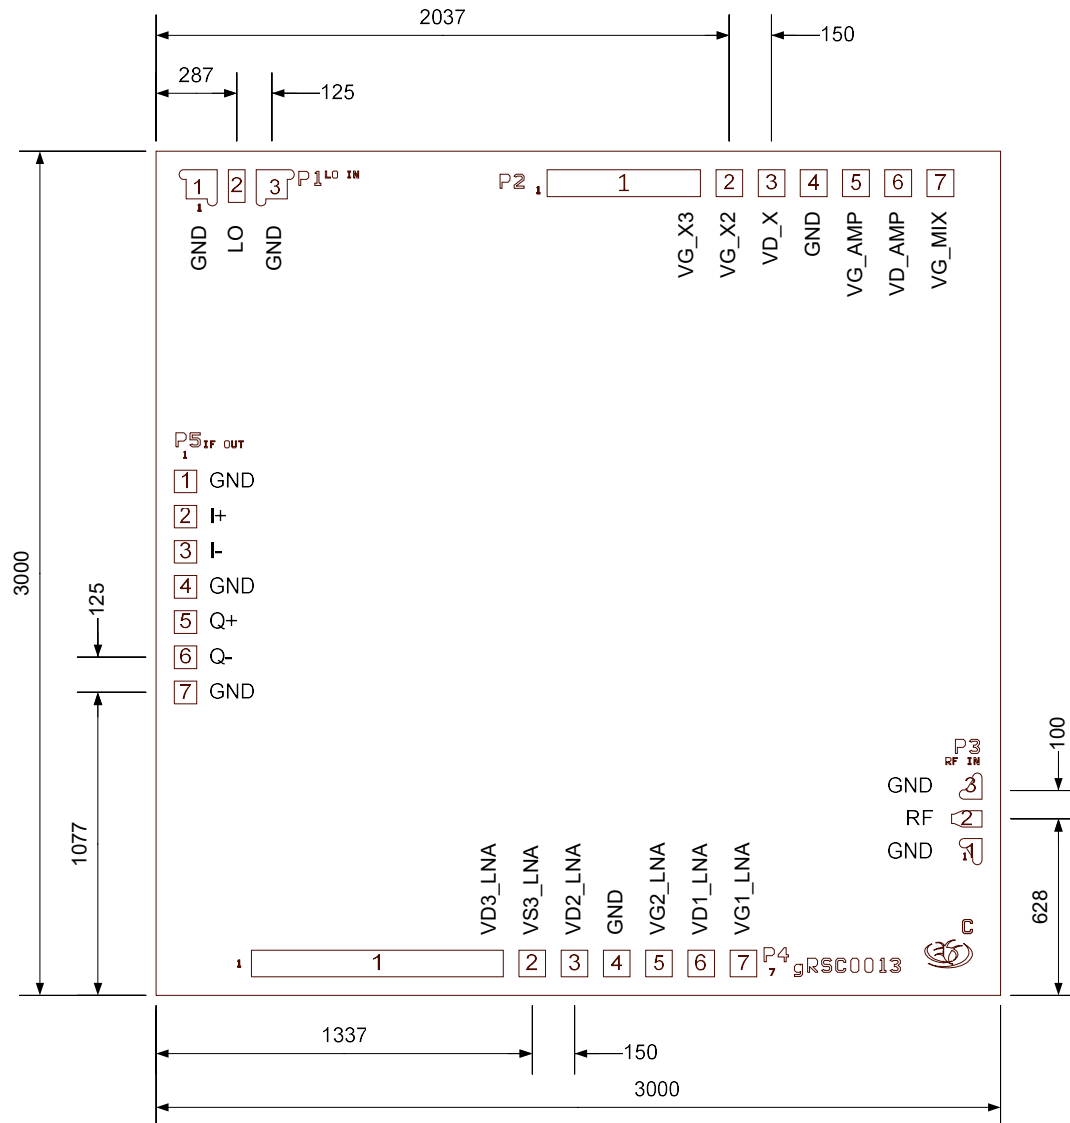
Outline drawing of the gRSC0013 MMIC. Dimensions are in μm .
